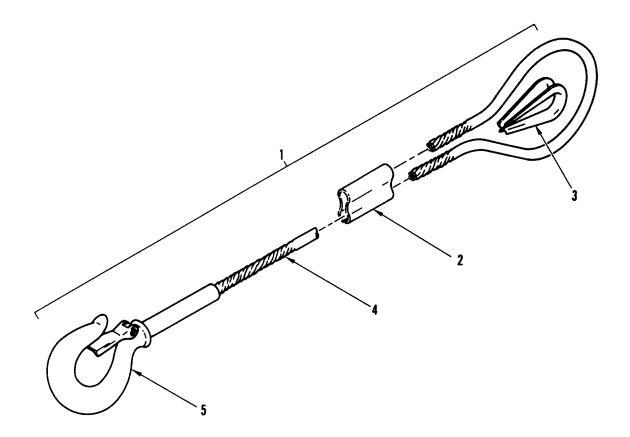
GROUP 80 SPECIAL TOOLS FORWARD WINCHING ADAPTER CABLE
